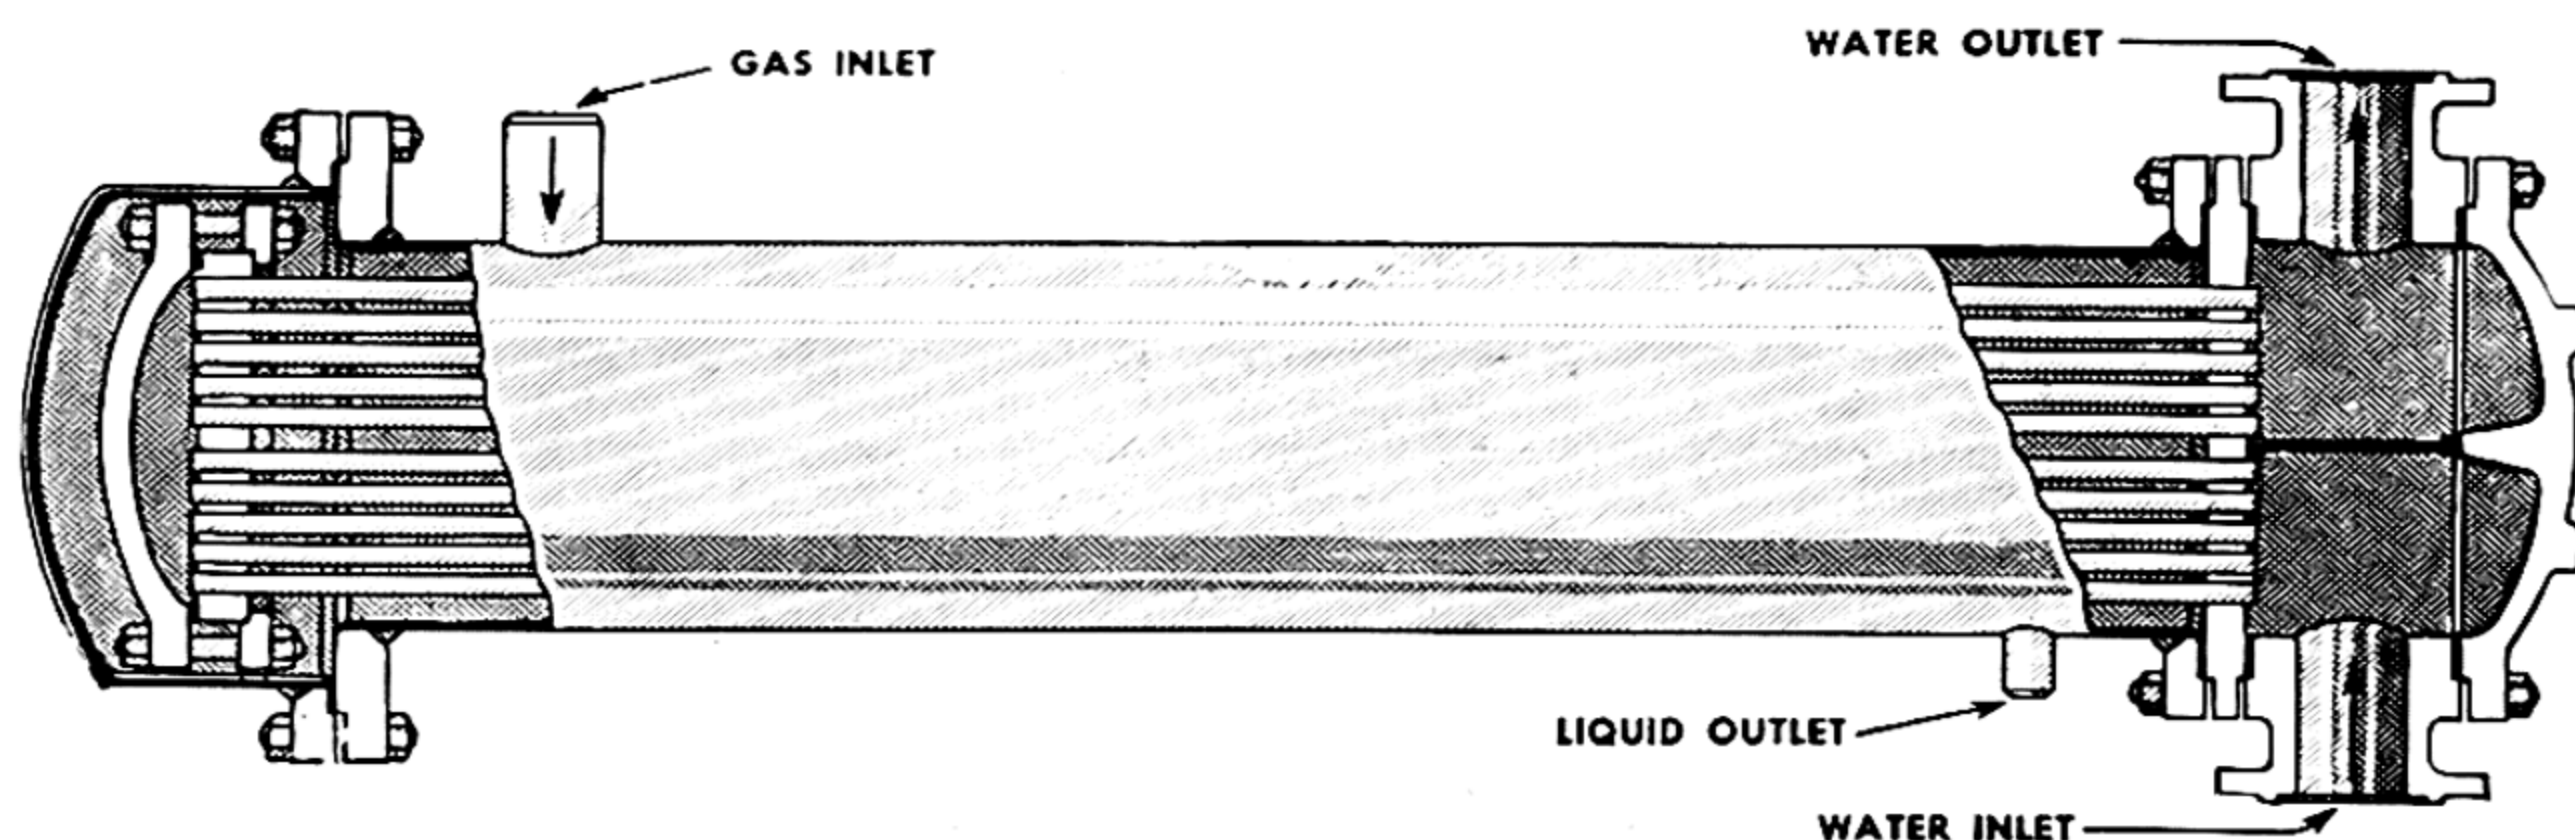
Two-pass shell-and-tube condenser. Courtesy Worthington Pump and Machinery Corp.
